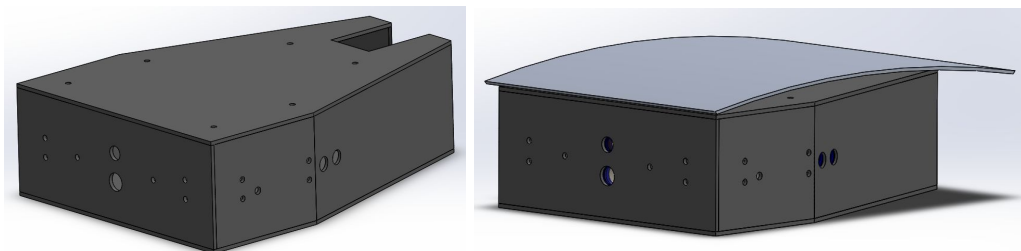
Finalized chassis shape with (right) and without (left) the aluminum shield
